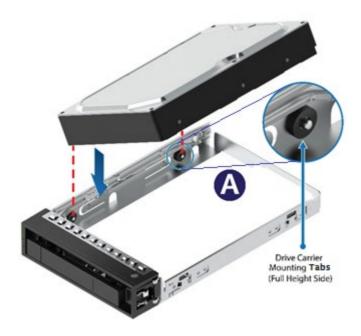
3.5" Drive Carrier Assembly - Drive Installation to Carrier
